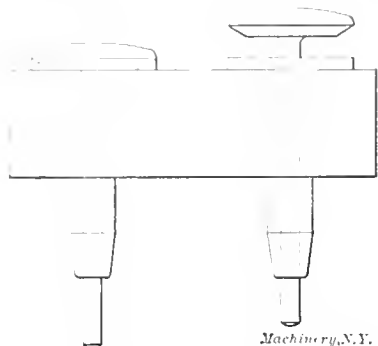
Type of Valves for which the Machine shown in Fig. 2 was designed.
